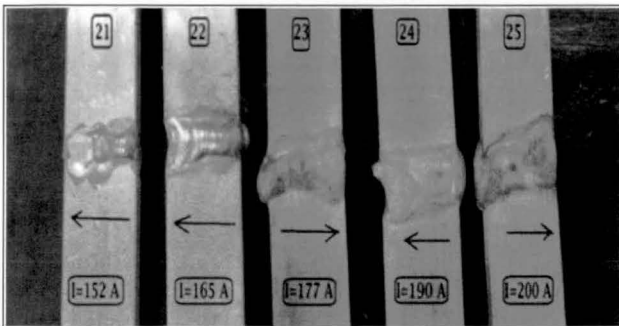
Weld beads at welding speed 130 mm/min.
